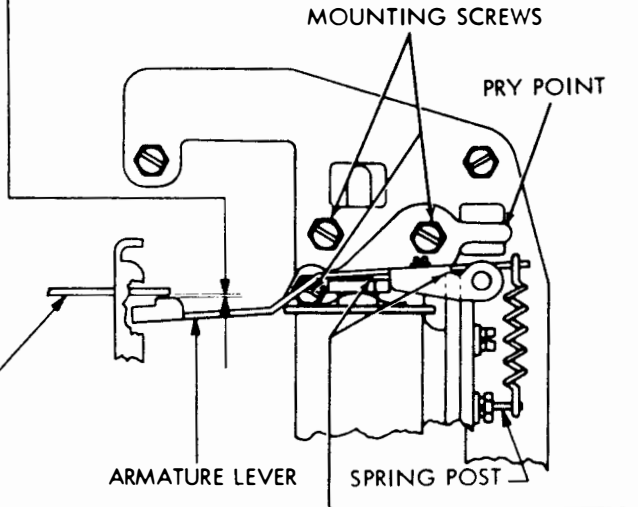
A. Keyboard, Synchronous Pulsed Magnet Mechanism
